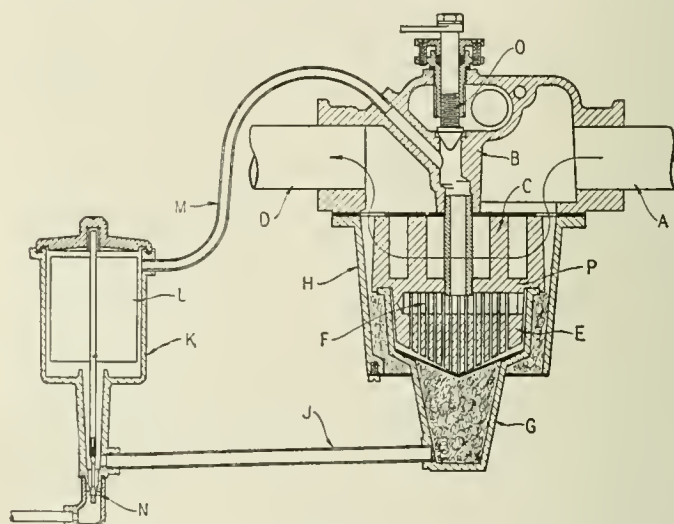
FUEL BOILER WITH THE KEITH AND WHATMOUGH CARBURETOR
